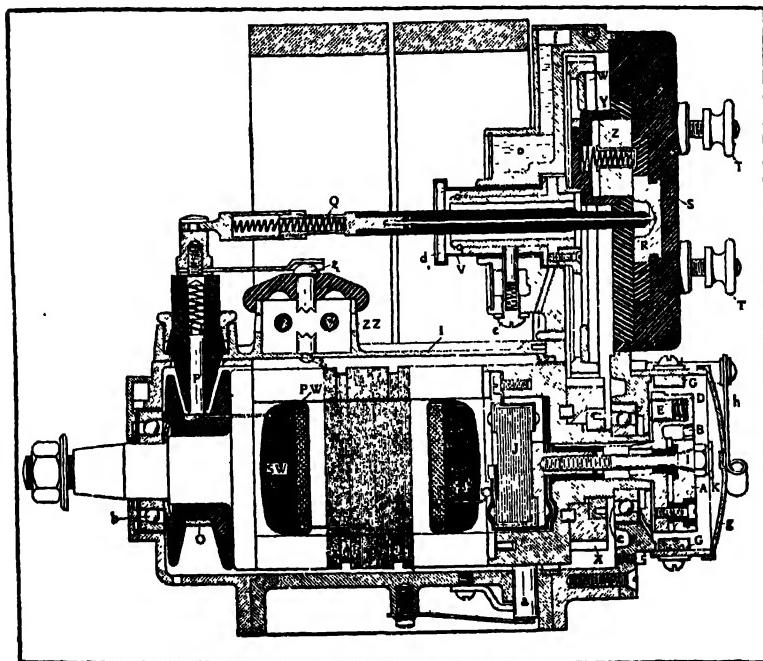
Sectional View of Bosch D U-4 Magneto.
